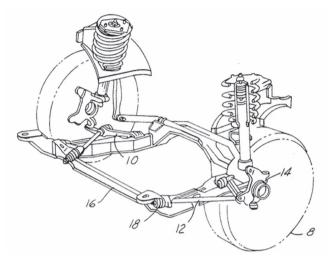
Perspective view of a front suspension of a front wheel drive motor vehicle incorporating a variable stiffness bushing in accordance with the present invention [5]
